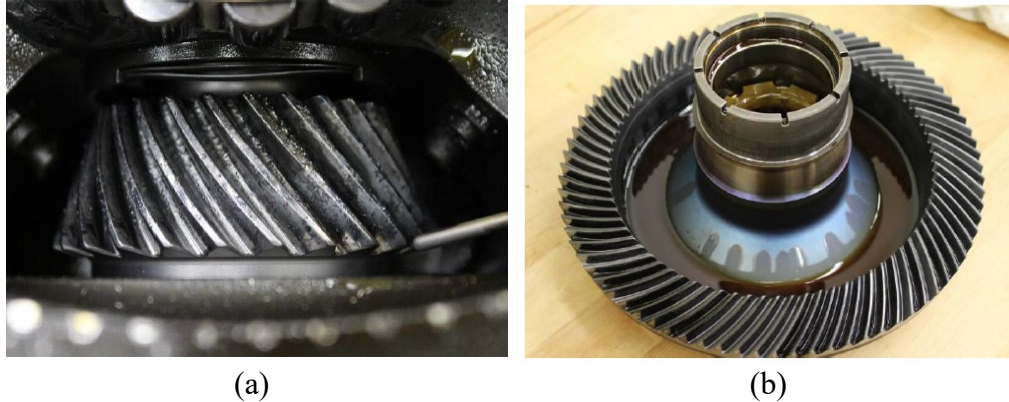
FARDS MRGB Ferrium C64 components after LOL: (a) input pinion and (b) gearshaft.²³
